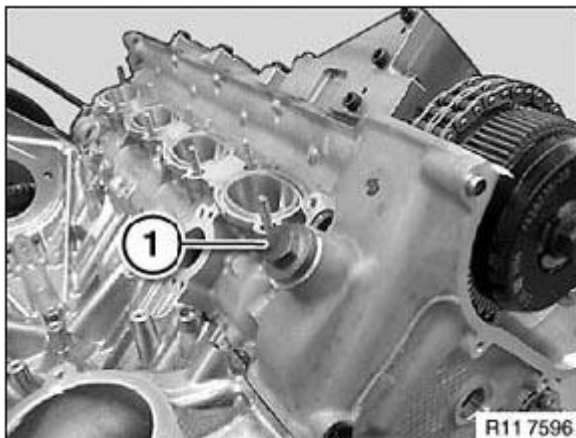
Identifying Special Tool (11 5 291 And 11 5 292)
